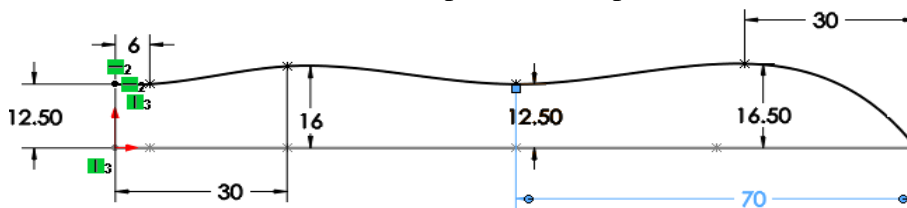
On the Front Plane using Line and Spline command, draw to the dimensions shown. A line 6mm in length is drawn first.
